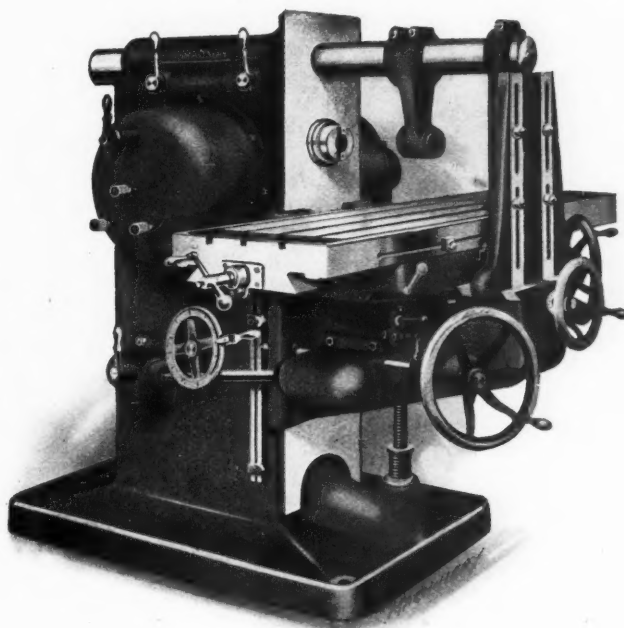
Conradson No. 3 Plain Milling Machine with Duplex Helical Drive
